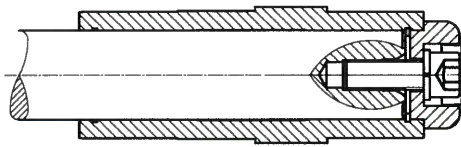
Gear unit mounted to shaft without a shoulder using the fastening element
